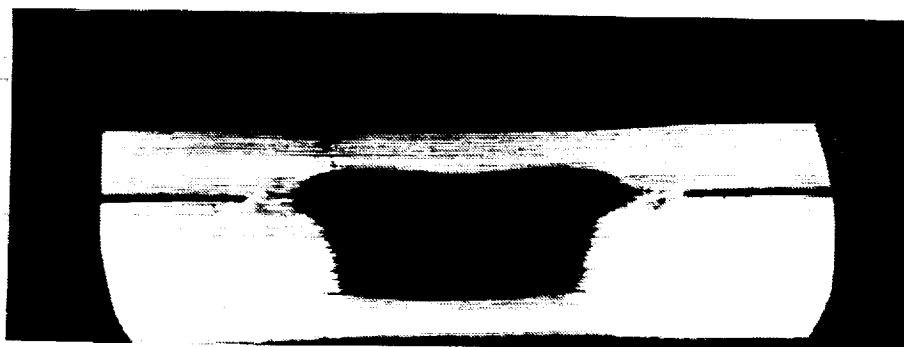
Repaired Diffusion Spot Weld in 0.090" 2090-T62 joined to 0.190" 2090-T83 Al-Li.
